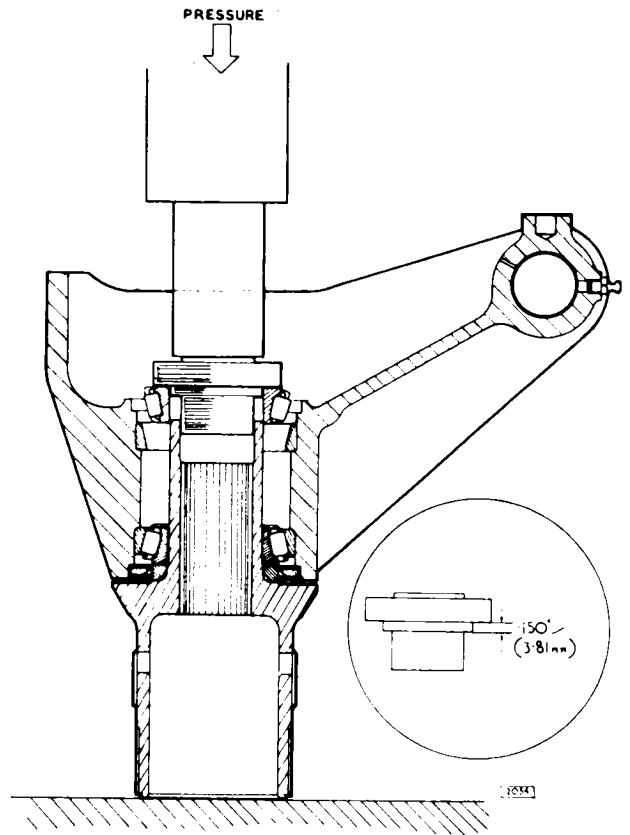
Pressing in the hub inner bearing inner race using the special collar (Churchill Tool No. J.15)
